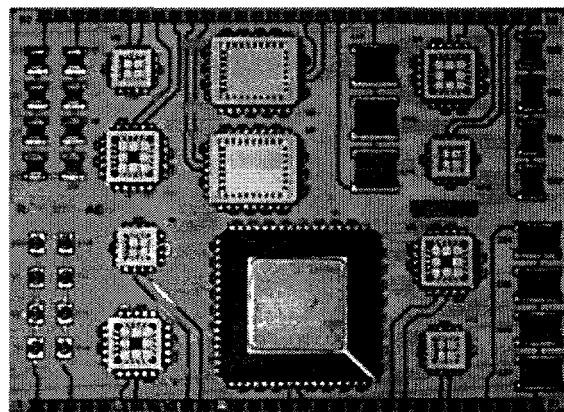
Hybrid test vehicle with components soldered in place with SnAg alloy.
